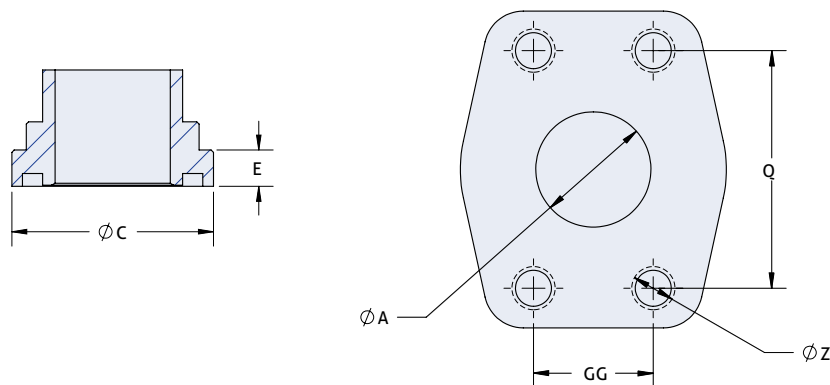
Code 61 and 62 Figures of the flange (Left) and bolt pattern (Right)
